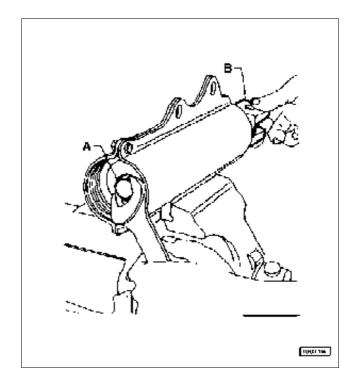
Sensing arm part stripping. A Tie rod B Fork
